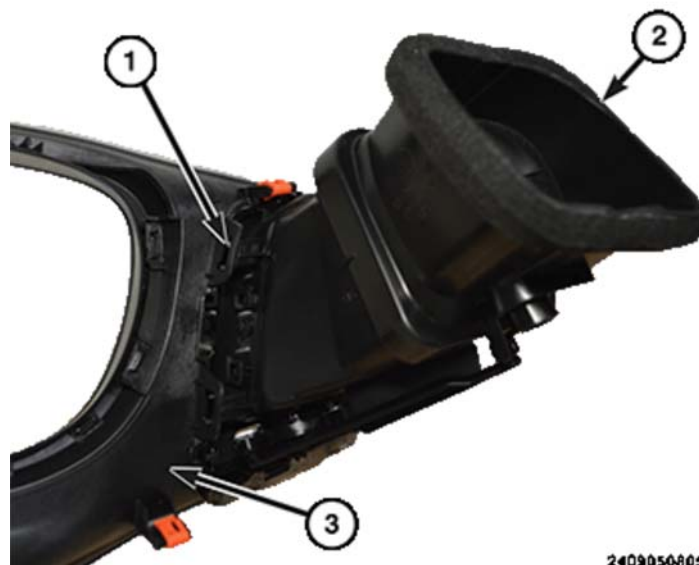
Air Outlet, Retaining Tabs & Instrument Panel Bezel
